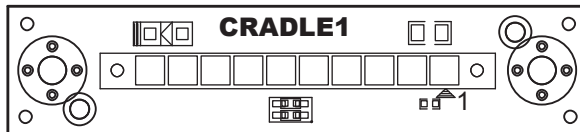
MR-5100RA-2 Daughter Board Component Locations (Top View)
